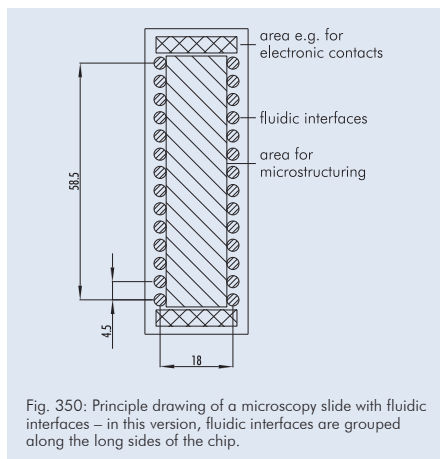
Principle drawing of a microscopy slide with fluidic interfaces – in this version, fluidic interfaces are grouped along the long sides of the chip.
